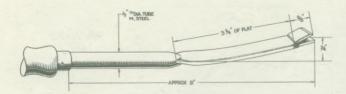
Details for manufacture of "U" clip inserting tool. See under "Re-assembly of front door"
